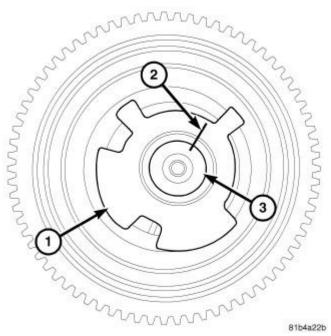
Exhaust Camshaft Oil Seal Courtesy of CHRYSLER LLC
